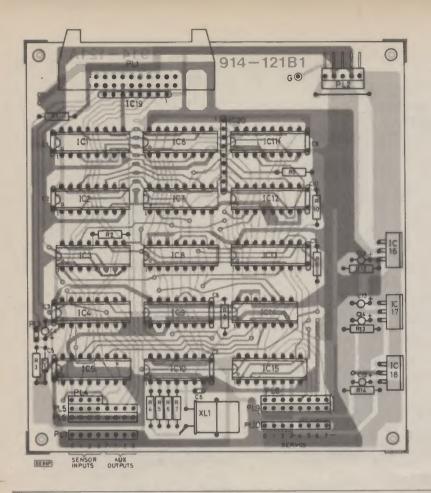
Printed circuit board component layout. (P.c.b. copyright Robot City Technology Ltd.)
